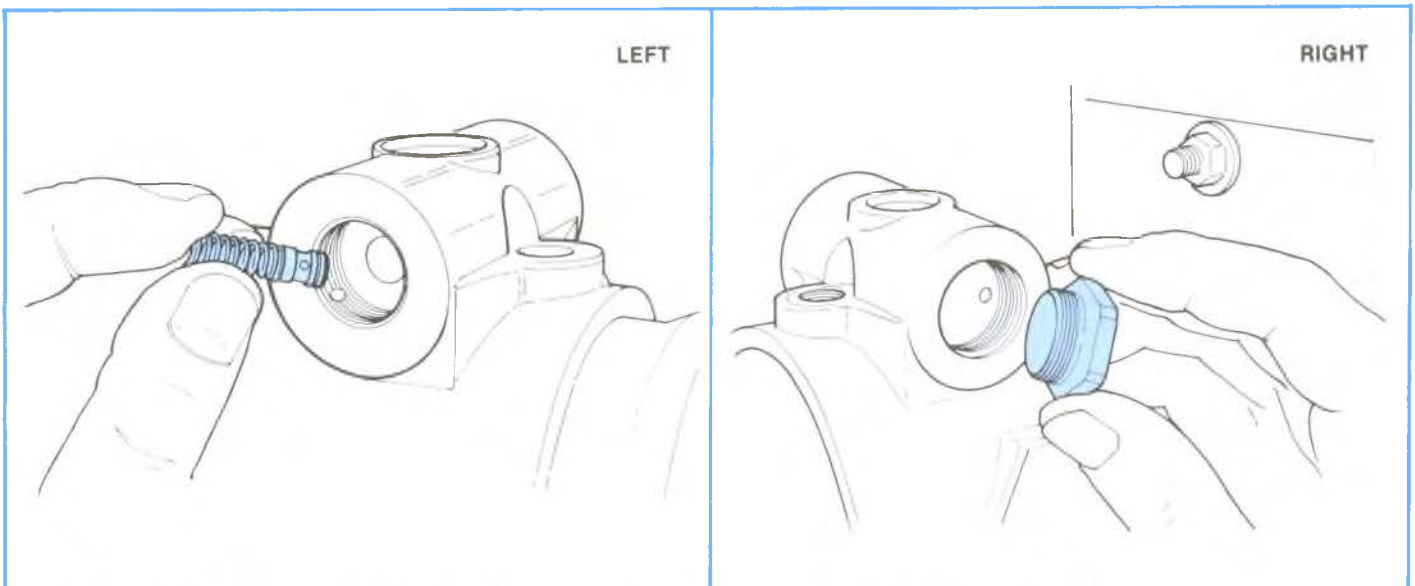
, Removing Spring and Valve (Left) and Power Side Plug (Right).
